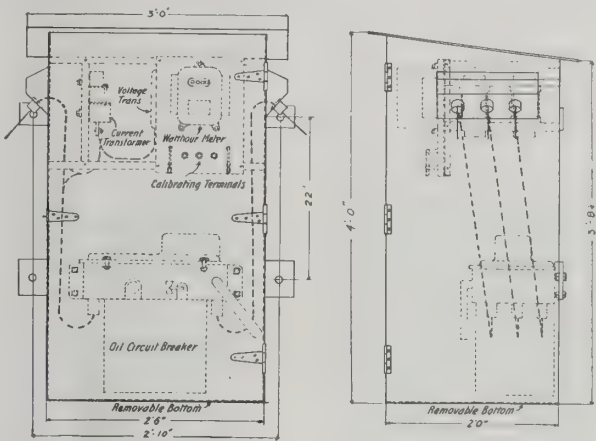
DIAGRAM OF OUTDOOR SWITCH HOUSE
